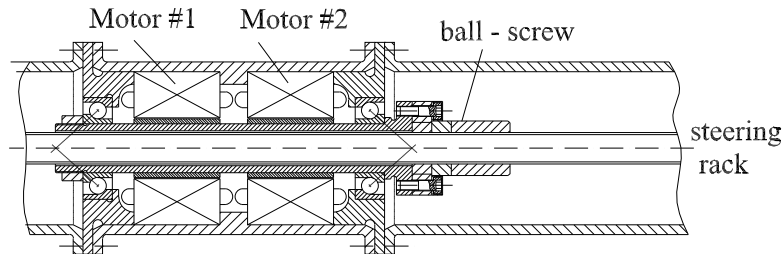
Electric power steering rack highlighting the two motors and the ballscrew system
